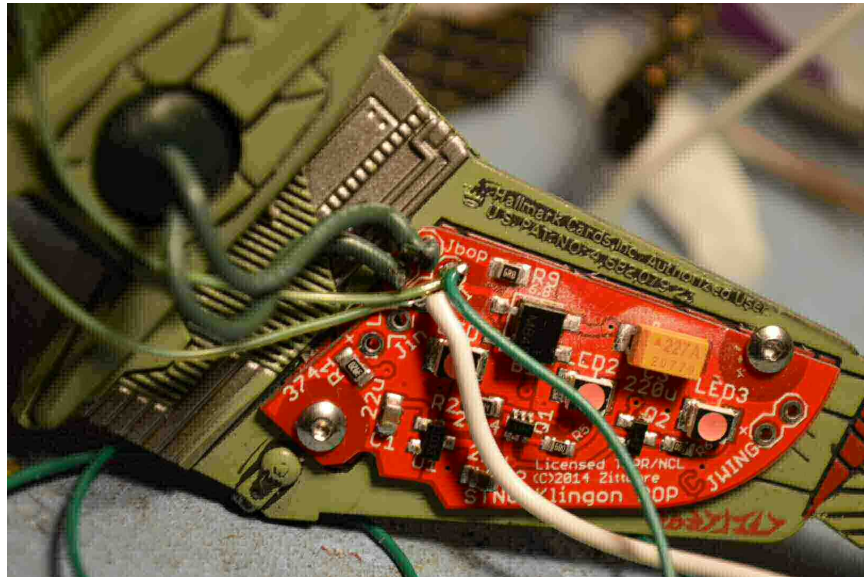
J<sub>GI</sub> Jumper Right-Wing PCB
